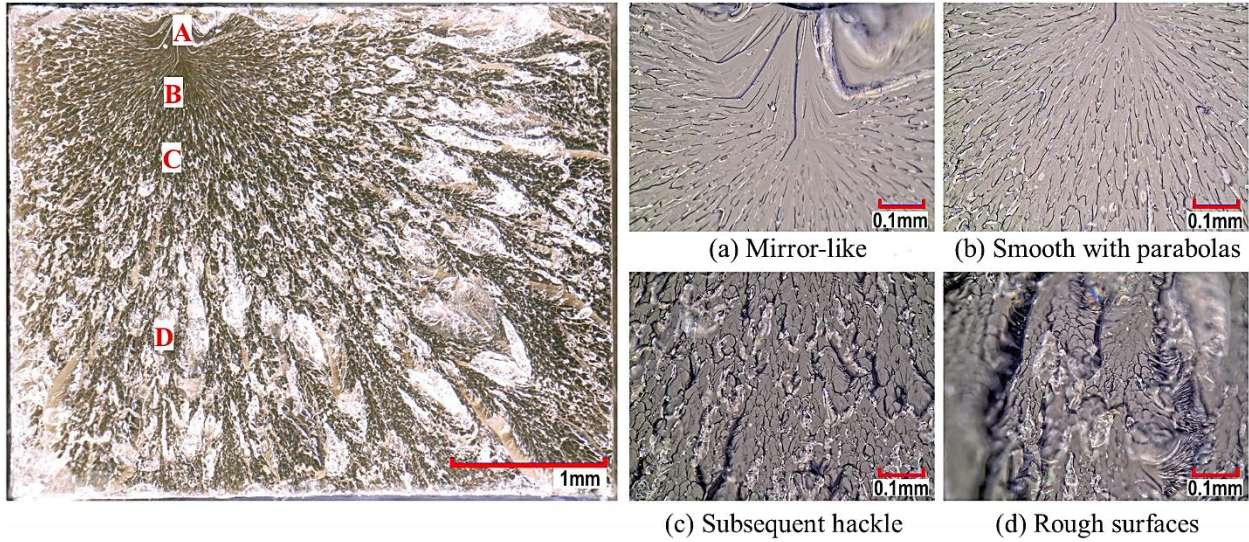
Fracture surface images for the quasi-static strain rate tensile test specimen (0.00033 s^{-1}).
